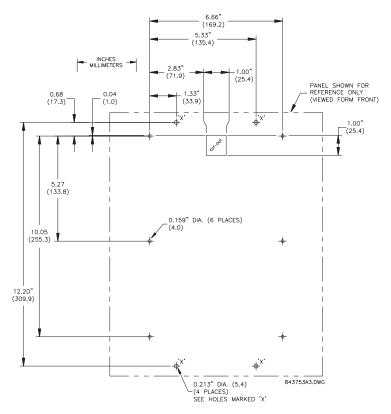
F60 VERTICAL SIDE MOUNTING REAR DIMENSIONS
